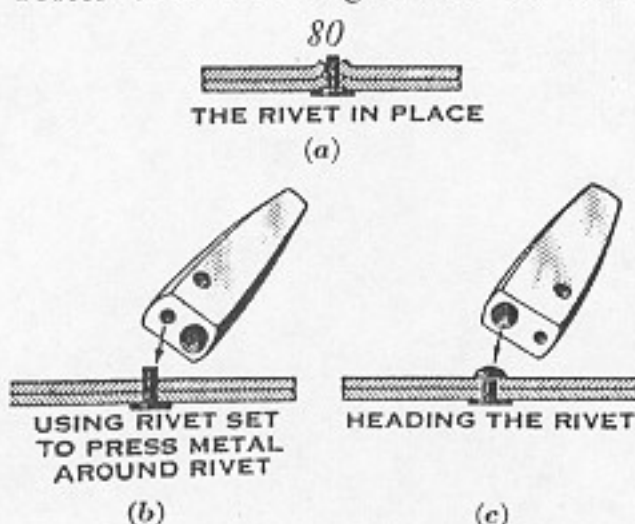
(a) The rivet in place; (b) using a rivet set to press the metal around the rivet; (c) heading the rivet. Rivets should not be located too close to the edge of the metal. They should be at least two times the diameter of the rivets away from the edge. (From Household Mechanics by Bedell & Gardner, copyright 1945, D. Van Nostrand Company, Inc.)
